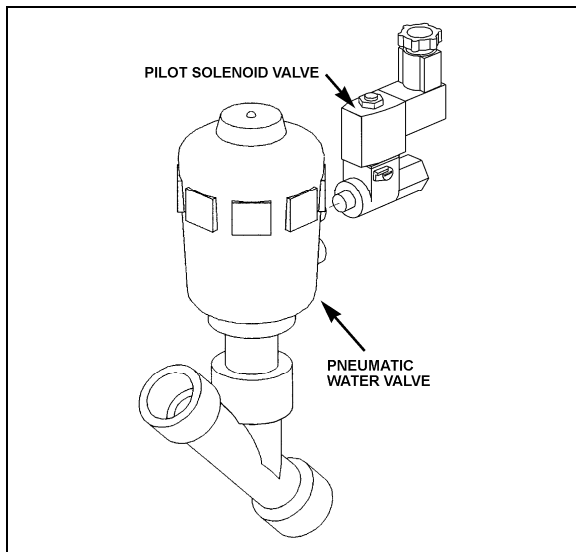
DRIVER'S HOT WATER PNEUMATIC VALVE ASSEMBLY
